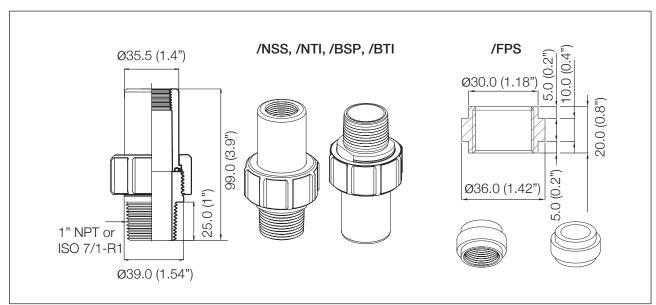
Dimensions 1" FU20-FTS/MTS adapter Stainless Steel & Titanium and FU20-FTS/MTS adapter for FF40, FS40 and FD40 fittings
